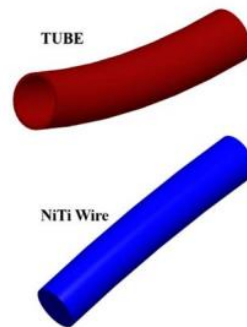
Initial Memorized Shapes of the Nitinol Wire and Tube Assembly
